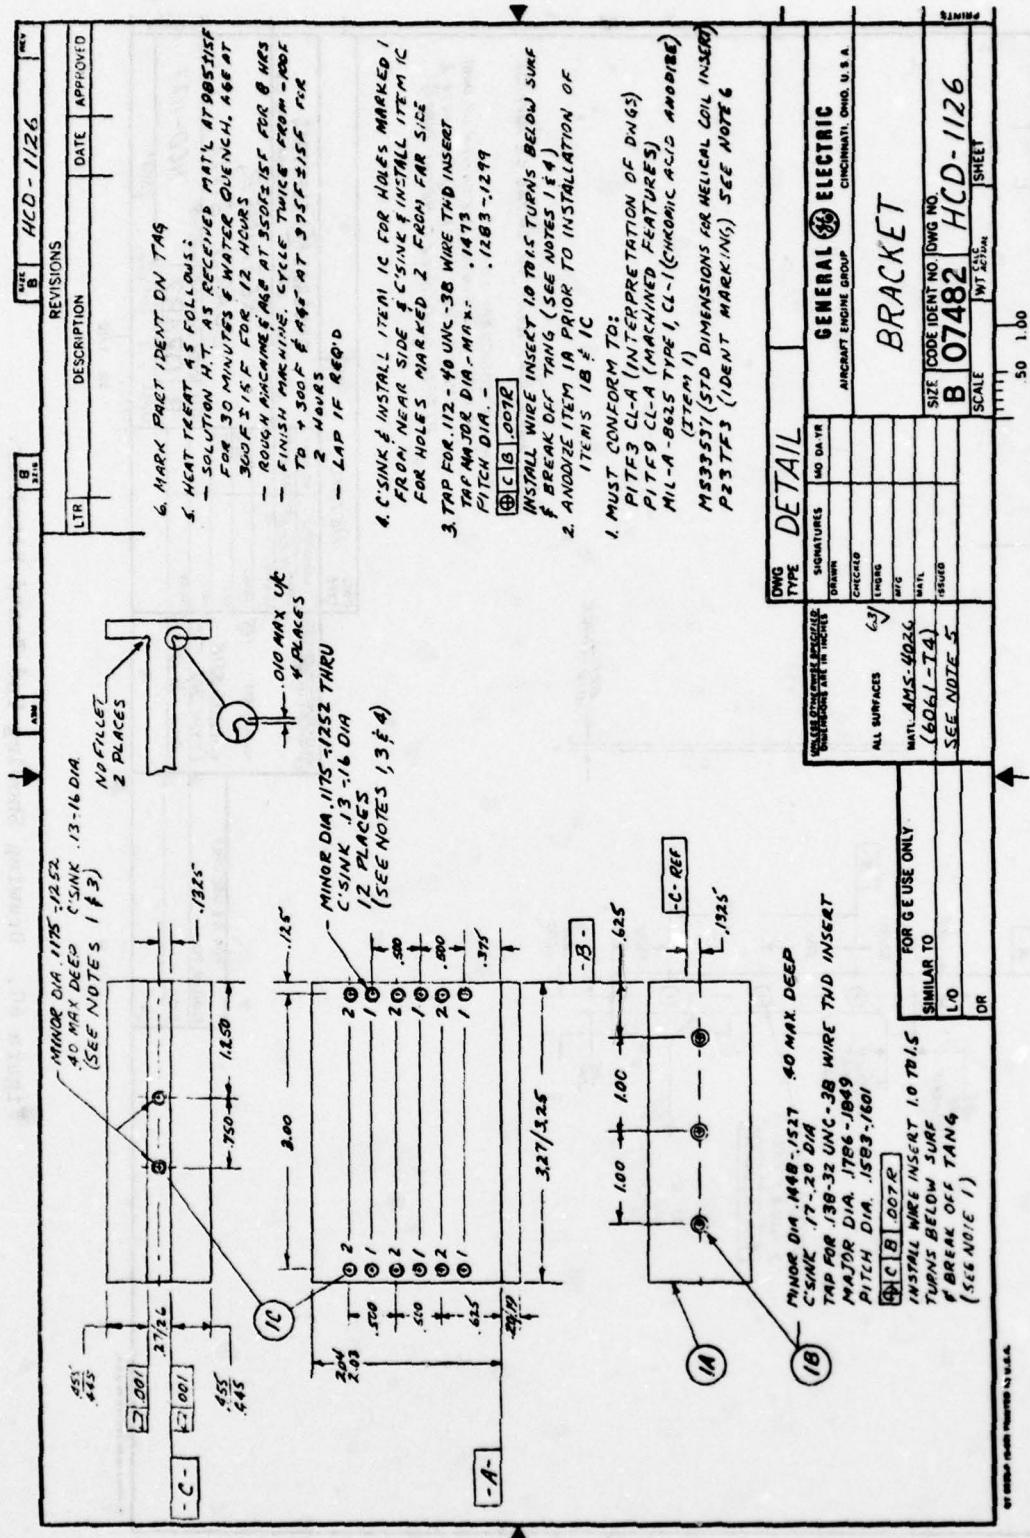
Drawing Showing Aluminum Mounting Bracket.
